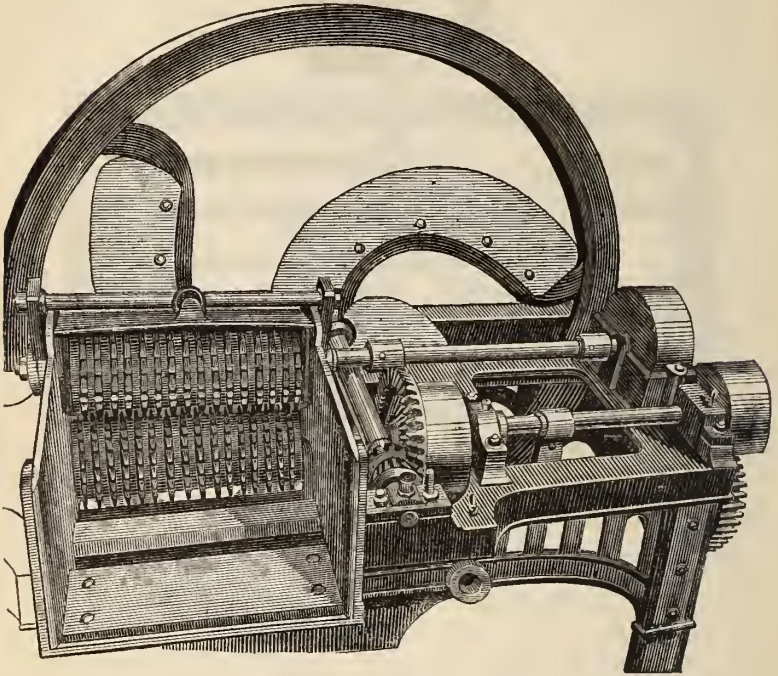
View of Messrs. Richmond and Chandler's Chaffcutter, No. 4881, showing Gearing.
